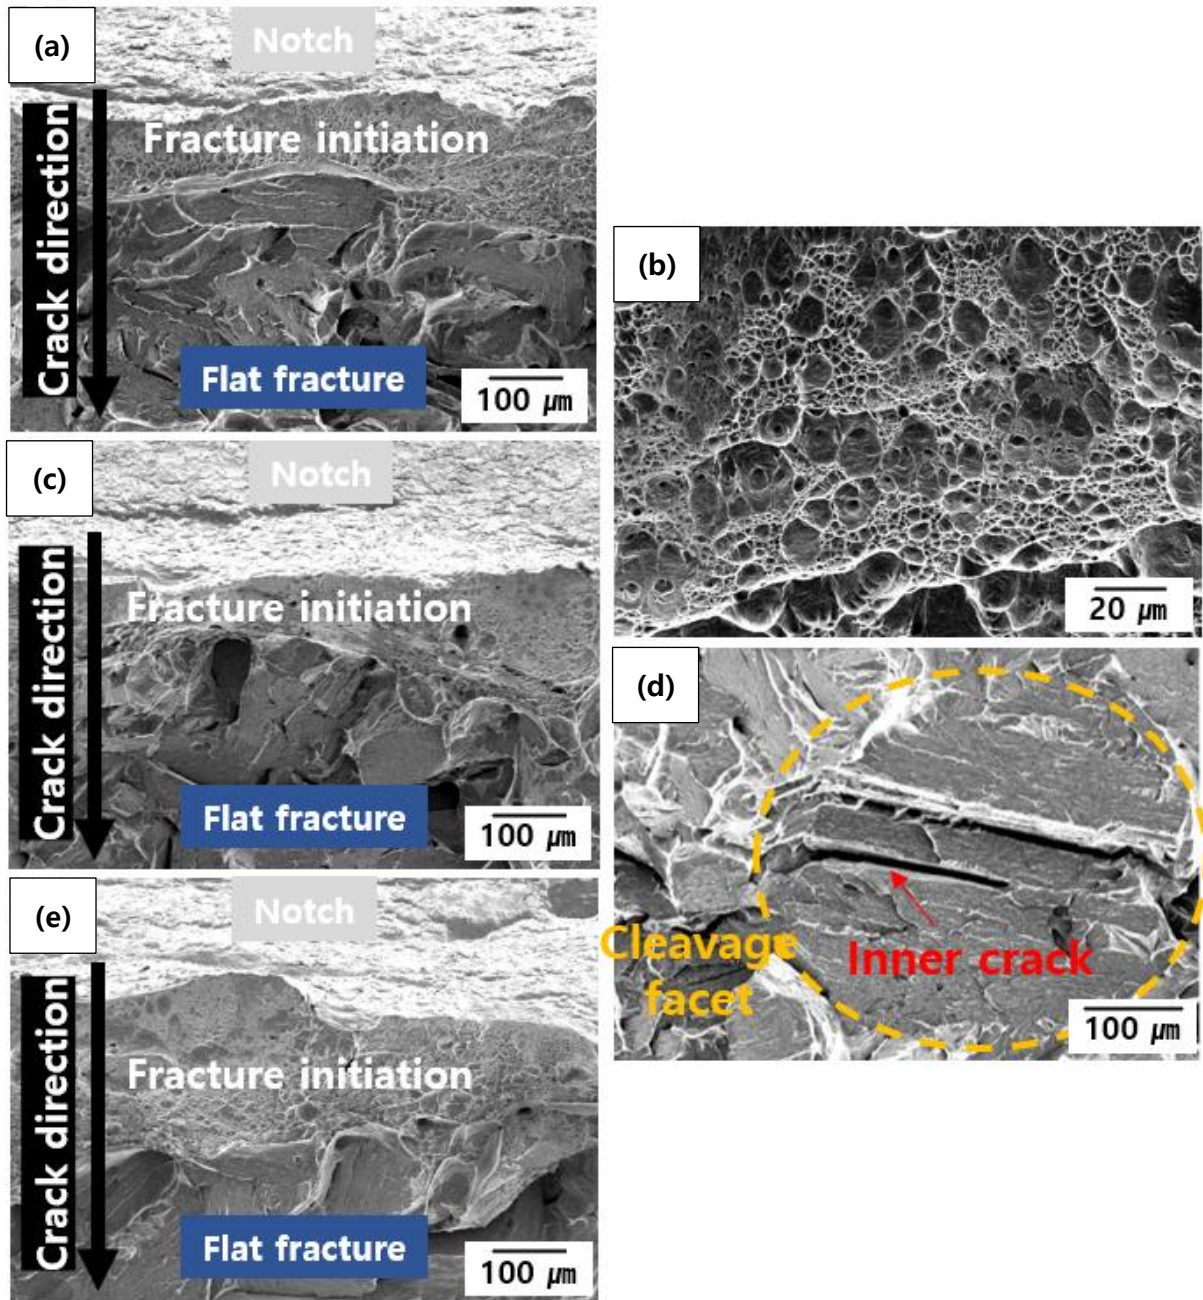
SEM fractographs showing overall fracture appearance of (a) CG-F, (c) CG-M and (e) CG-S specimen, SEM fractographs showing (b) fracture initiation region and (d) flat fracture region in CGHAZ Charpy impact specimen
